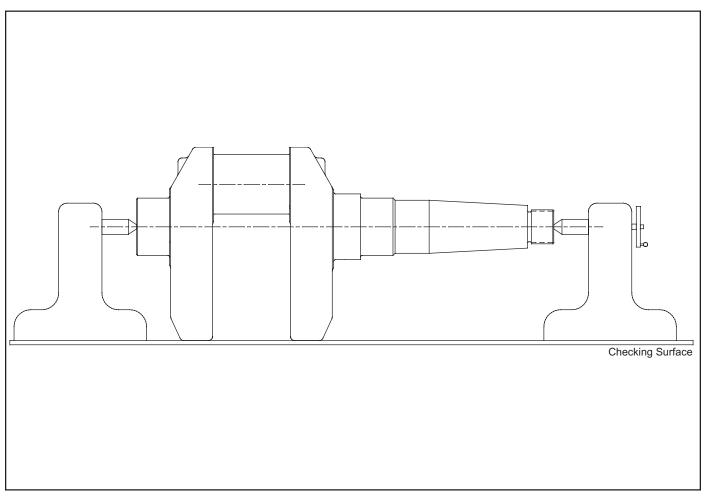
Crankshaft Undersize Dimensions & Alignment Specifications
